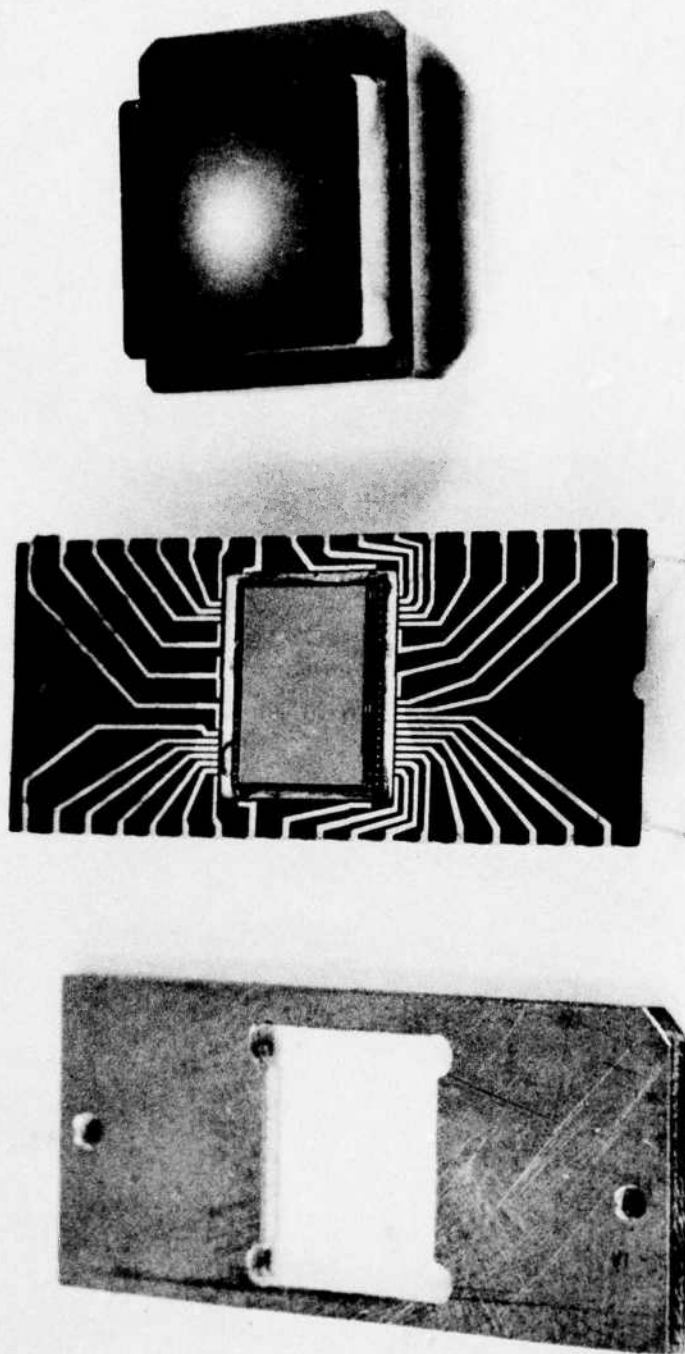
CCD-MINIFIER SUBASSEMBLY COMPONENTS
